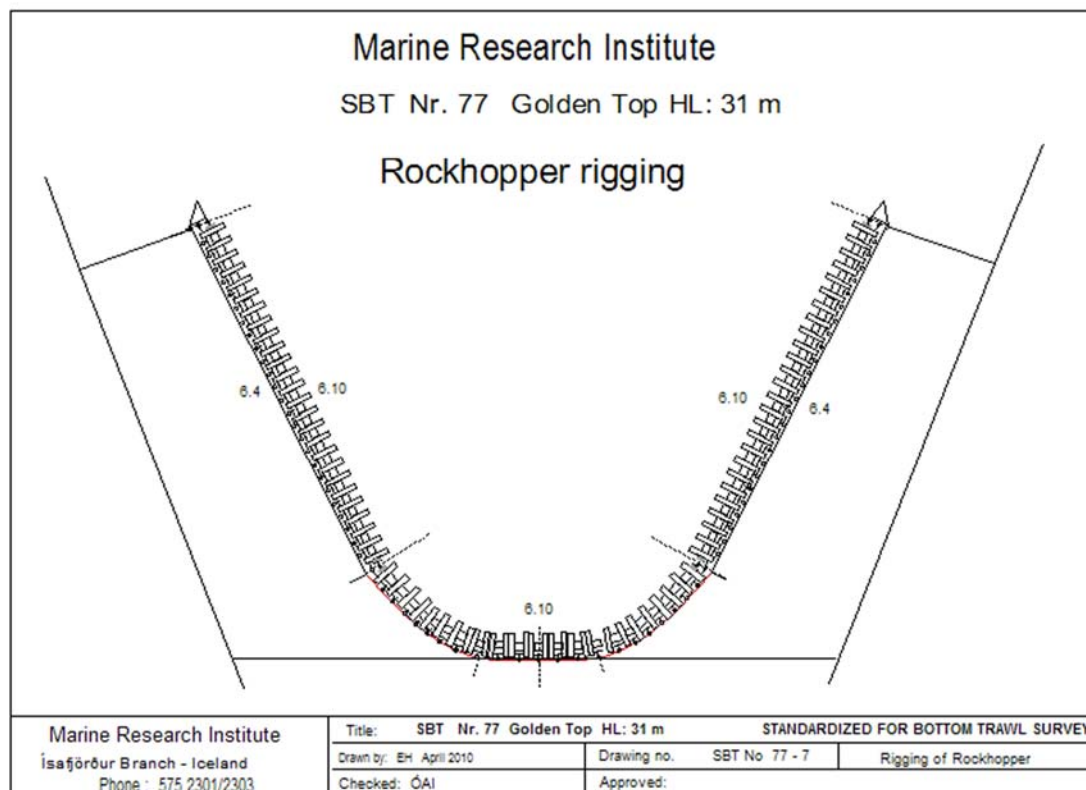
Standardised bottom trawl no. 77 used in the shallow water in the Autumn Groundfish Survey. Rigging of rockhopper.
